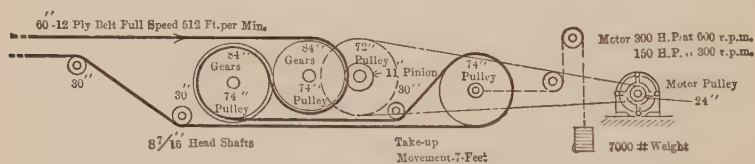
Tandem Drive for 60-inch 12-ply Belt. (Robins Conveying Belt Co.)
